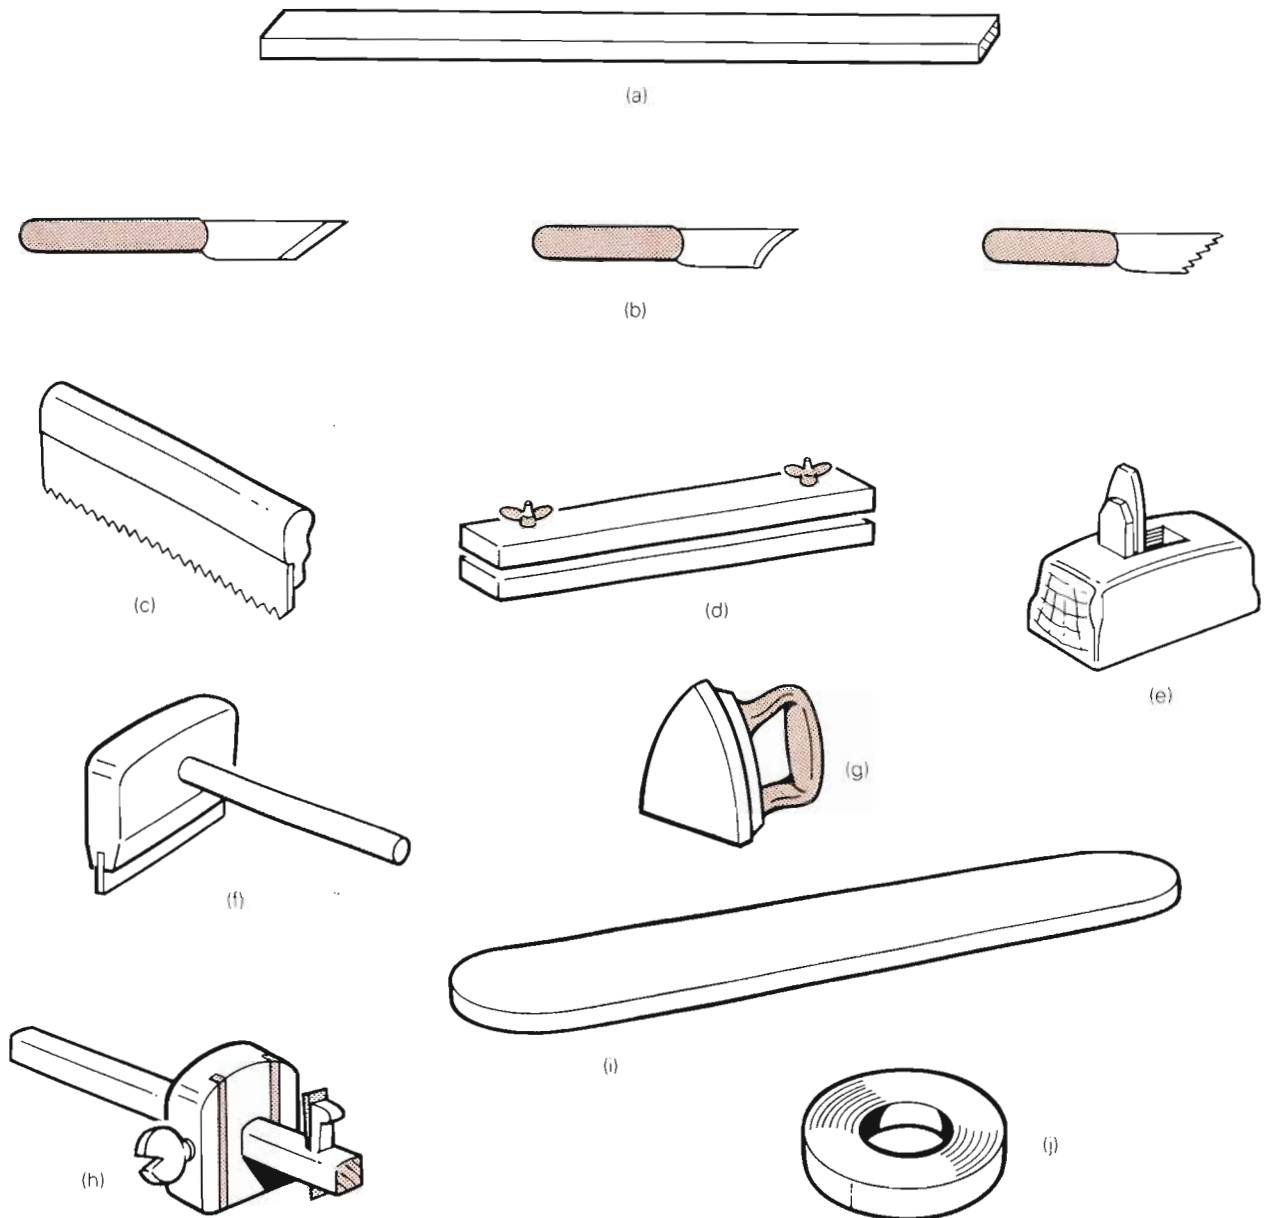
Veneering tools: (a) straight edge, (b) veneer knives, (c) veneer saw, (d) veneer clamp, (e) tothing plane, (f) veneering hammer, (g) flat iron, (h) cutting gauge, (i) taping stick, (j) gummed tape.
